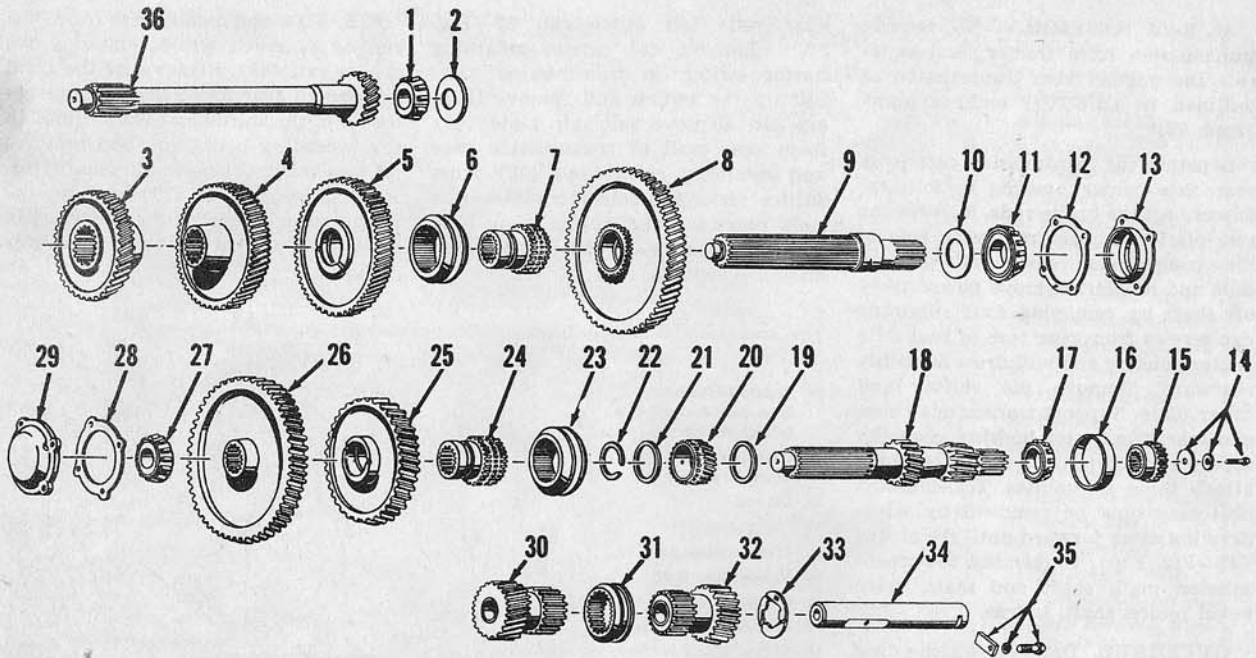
TO20, and TO30 transmission shafts, gears and components. Gears (8 & 20) rotate on needle bearings. Refer to Fig. F35.
